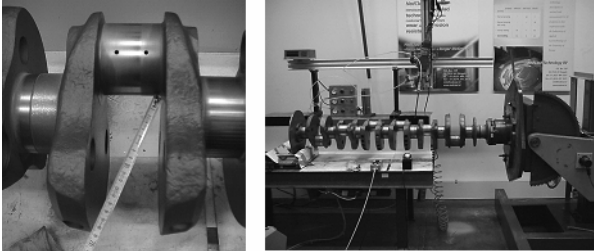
Repair of a diesel engine crankshaft (Photo courtesy NedClad)
